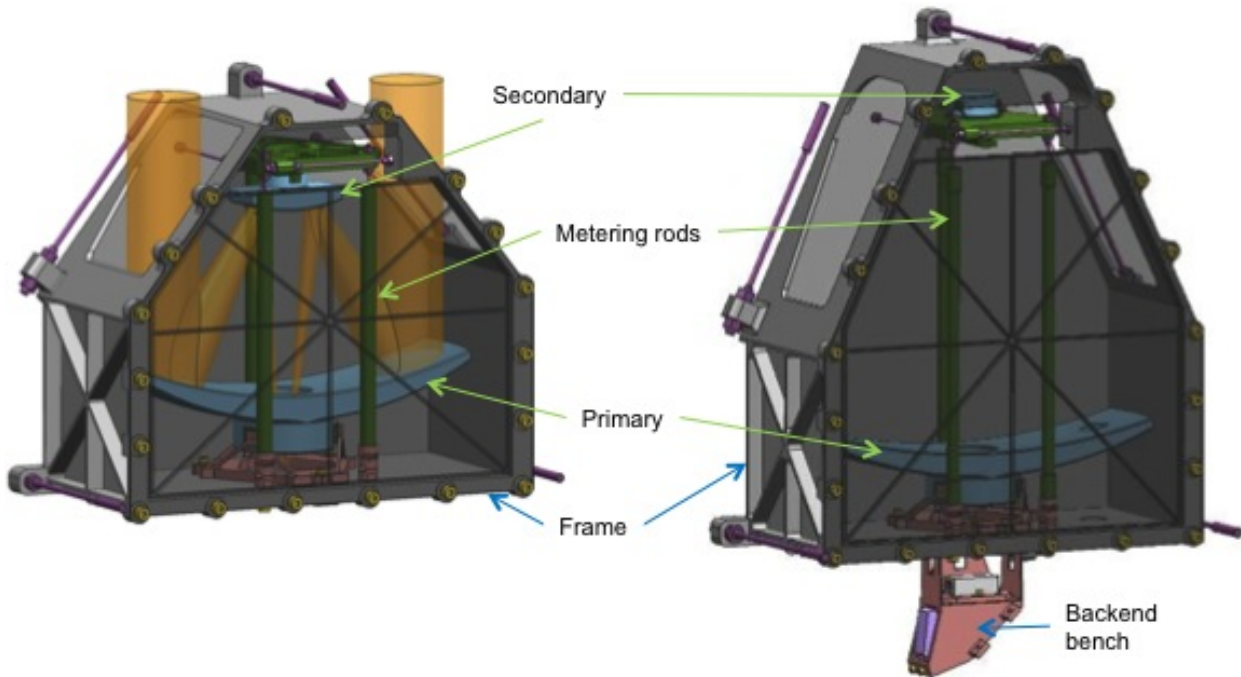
Left: A view of the angle tracker assembly (AMM). The primary mirror is fixed to the frame and the secondary is adjusted with respect to the primary to achieve the desired WFE. Right: A view of the fringe tracker assembly. Again, the primary is fixed and the secondary is adjusted relative to it. The dispersing optics are mounted to a backend bench that is mounted to the frame. Note that the doublet lens is part of the camera assembly.
